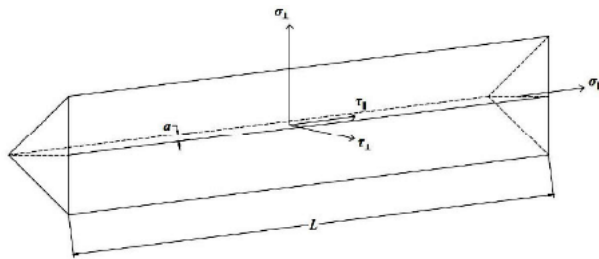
Stresses on the throat section of a fillet weld [9]
